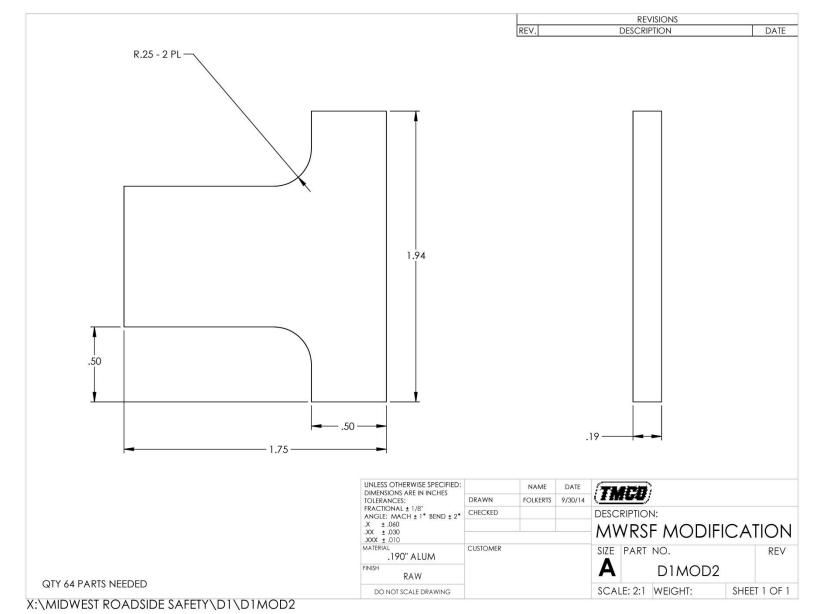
Fabrication Drawings, Test Nos. APR-1 and APR-2
